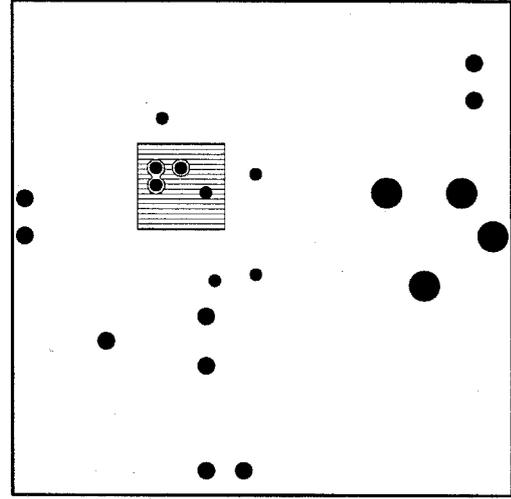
Recommended micro SMD PC board layout: Inner layer ground layout
